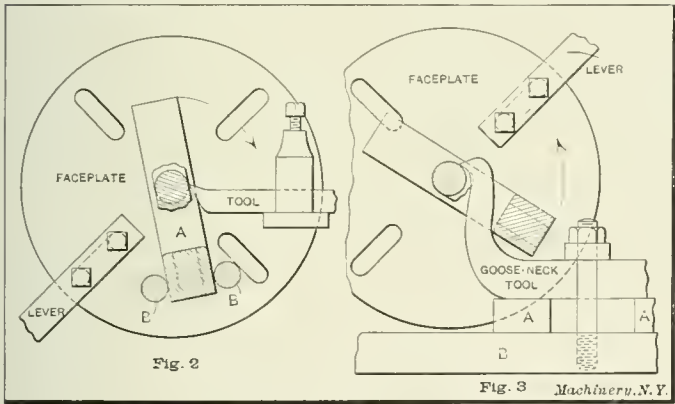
Machining Open Side of Wrist-pin. Fig. 3. Machining Piston-rod Side of Wrist-pin
